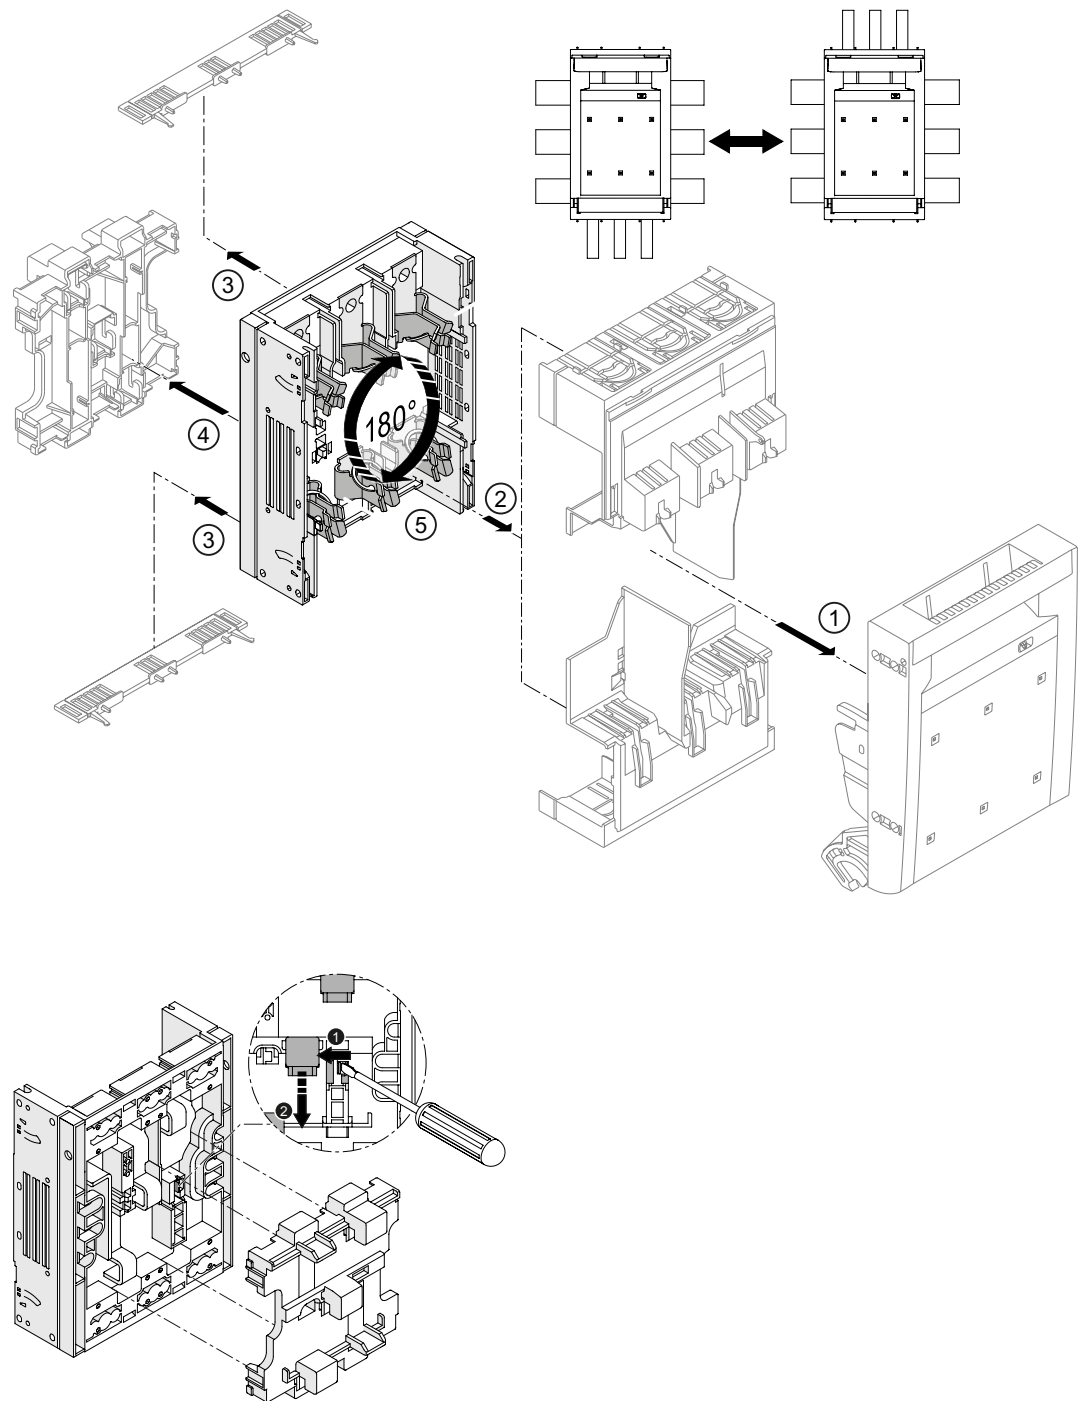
Installing the cable outlet, sizes 1, 2, 3
